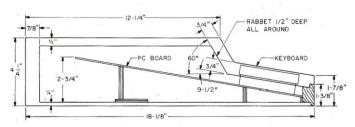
A cross-section view showing dimensions of the side boards and placement of the computer board.
